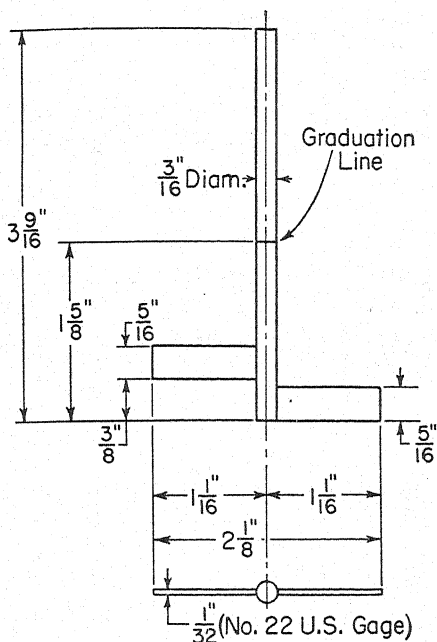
Stormer Viscosimeter with Paddle-Type Rotor.
